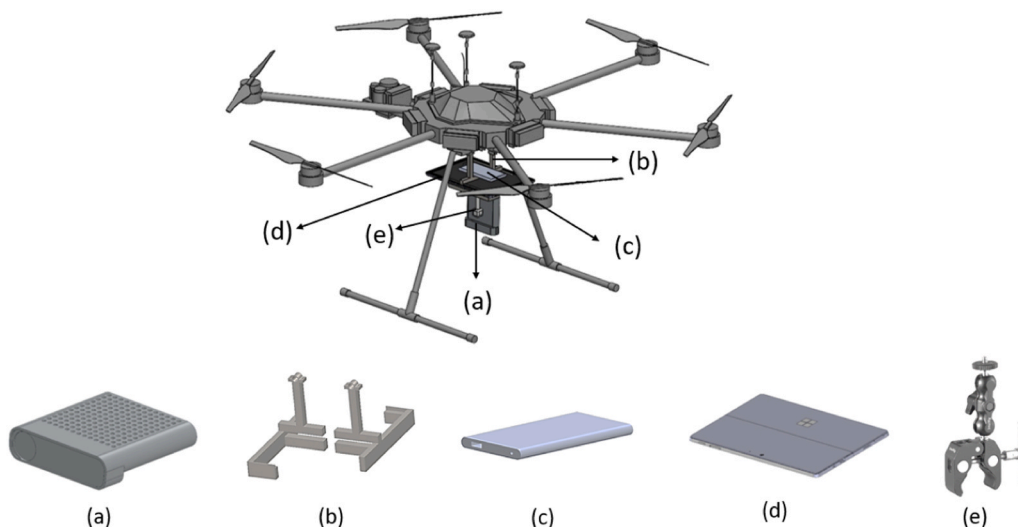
Drone and installed equipment, (a) Azure Kinect camera, (b) laptop 3D printed holder, (c) power bank, (d) surface laptop, and (e) camera clamp.
